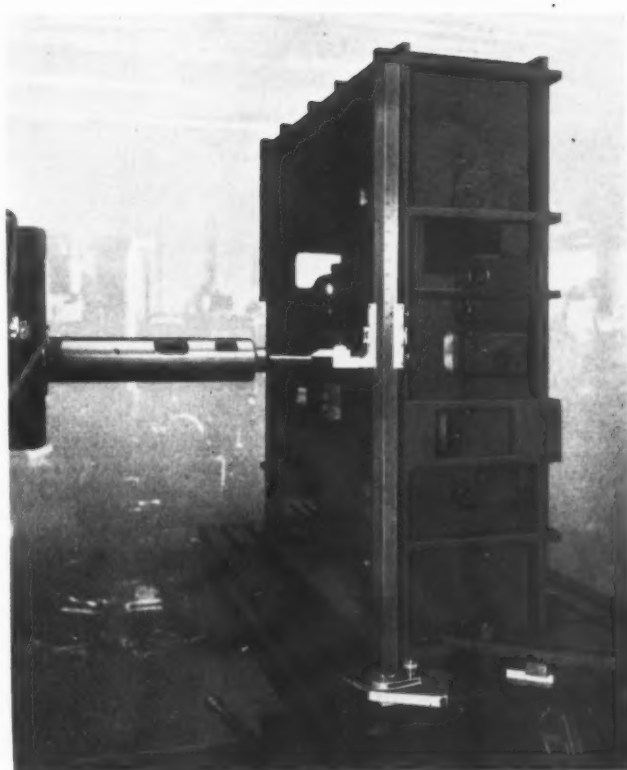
Applying the Height Gage in Setting the Tool-spindle of a Boring Mill for the Accurate Machining of a Large Jig Casting
